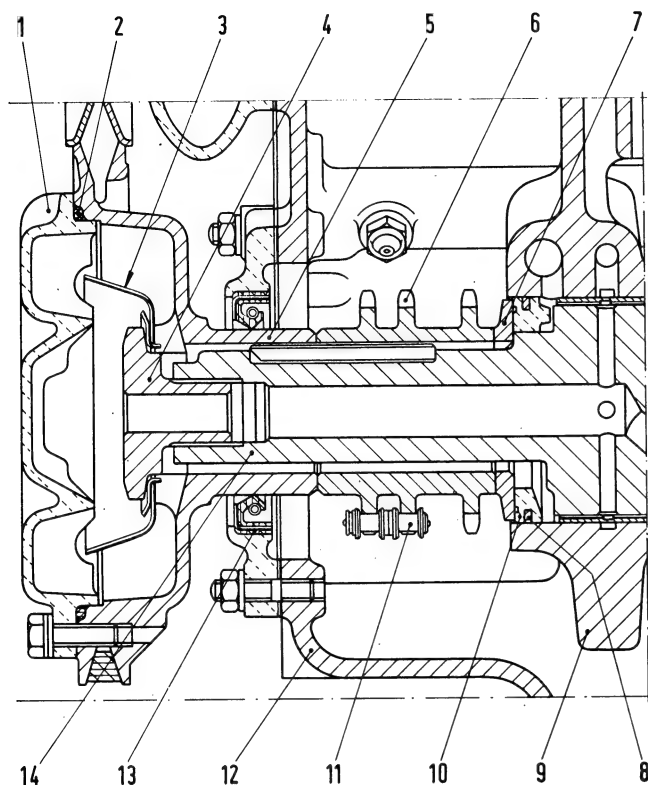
Detail of 118 B.000 engine side section view across centrifugal oil filter.
